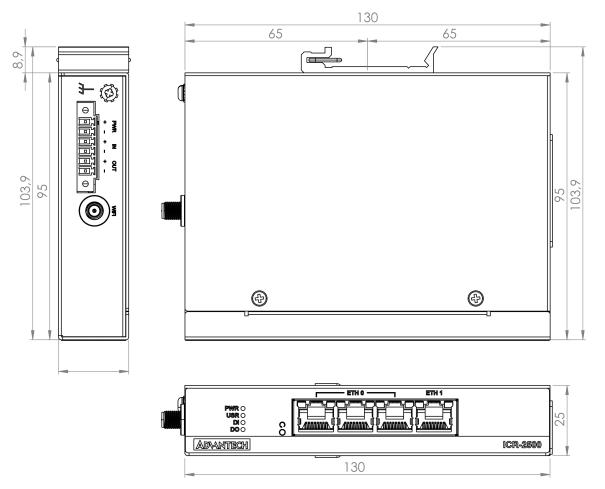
Router Dimensions - Top, Side and Front View with DIN Rail Clip
